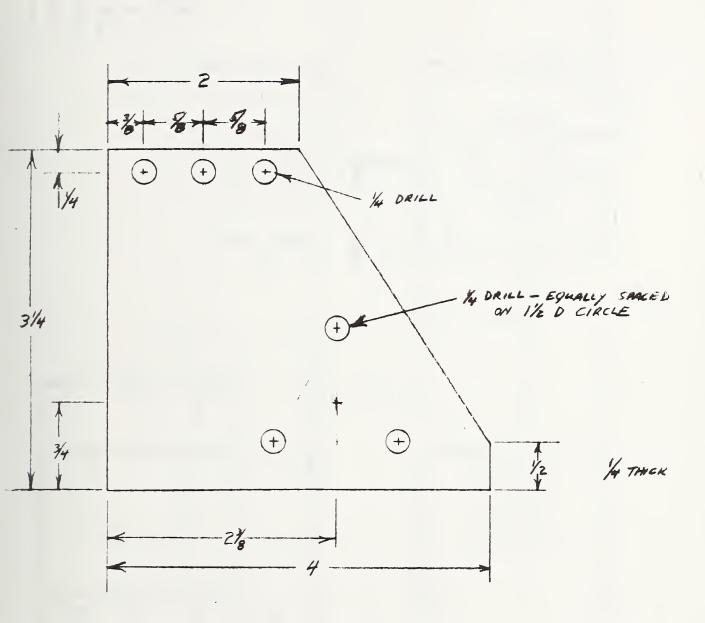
CHAIN TEST PIECE Z MAT'L ALUM
